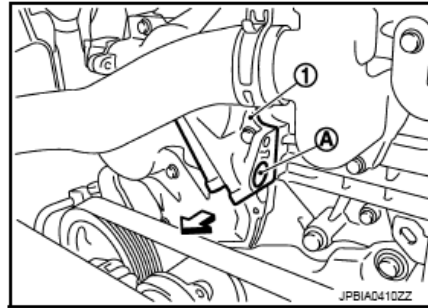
Identifying Valve Timing Control Cover And Solenoid Valve Hole
